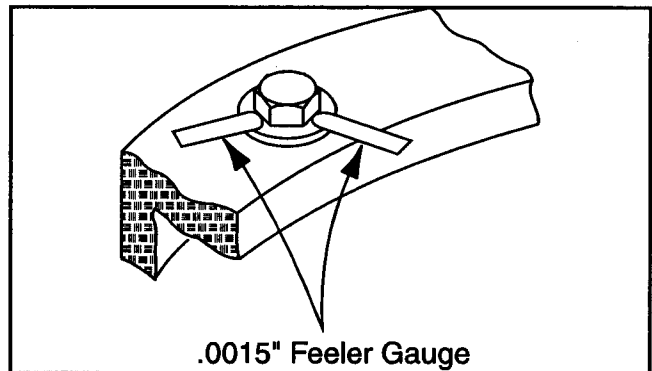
Swing Bearing Bolt Feeler Gauge Check.
